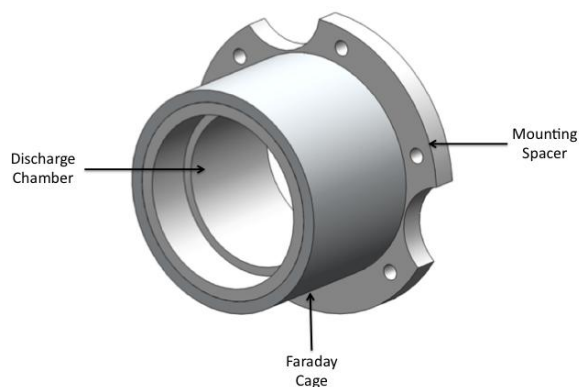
CAD representation of the MMIT's discharge chamber subassembly.
